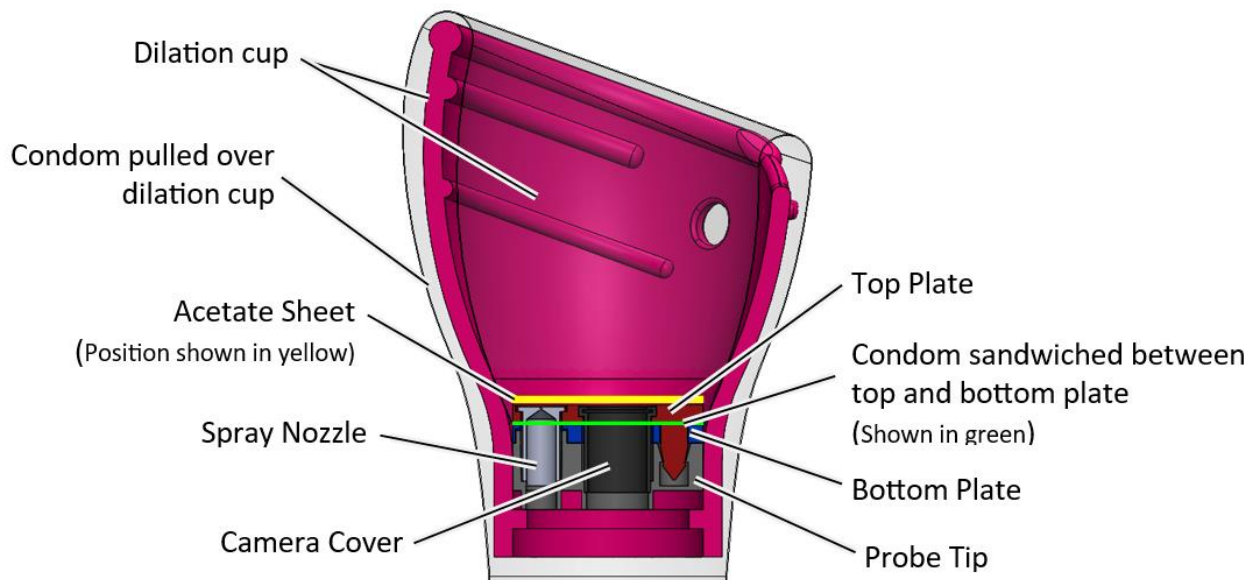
Cross-section view of faceplate assembly and attachment to the sheath (condom).
